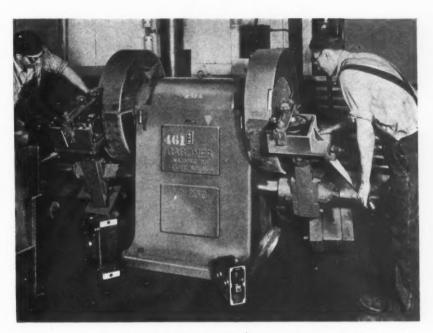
Disk Grinder with Two Universal Lever-feed Tables, Each Carrying a Special Fixture
